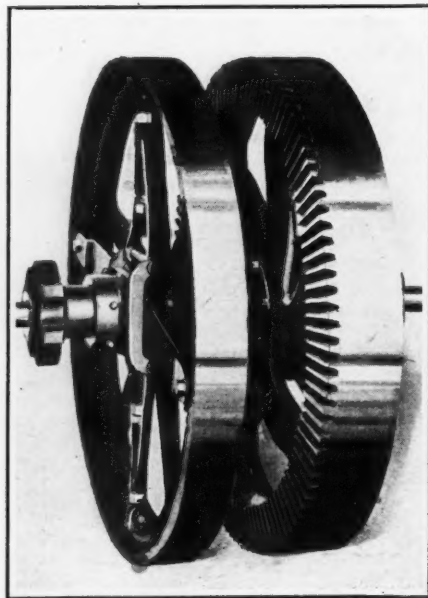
Main Drive Gear and Friction Wheel of 75-horsepower Tractor
